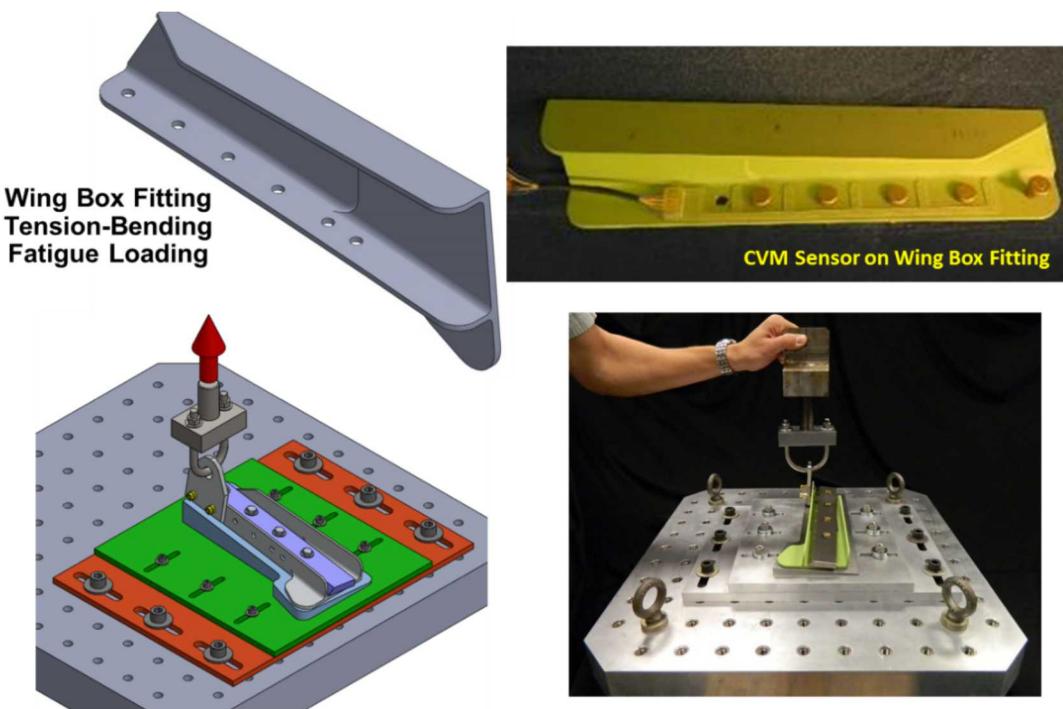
CVM Performance Tests 737NG Center Wing Box Fittings – Note use of Angled Mounting Fixture to Produce Proper Ratio of Tension and Bending Stress
